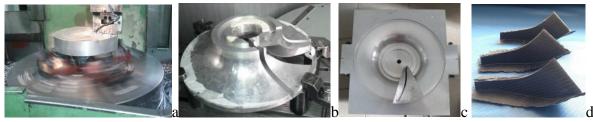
a) b) intermediary machining steps of the Al 2024 – T351 block; c) preliminary manufactured mould version; d) first impeller blades 1:1 scale first technological trials
